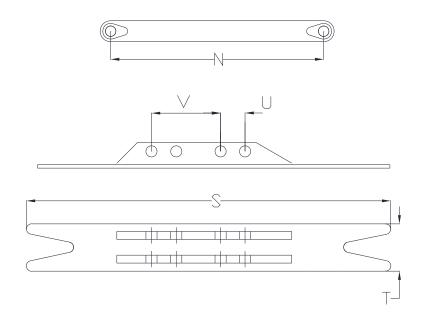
Stiff Arm & Mounting Pad (4-Hole Configuration)
